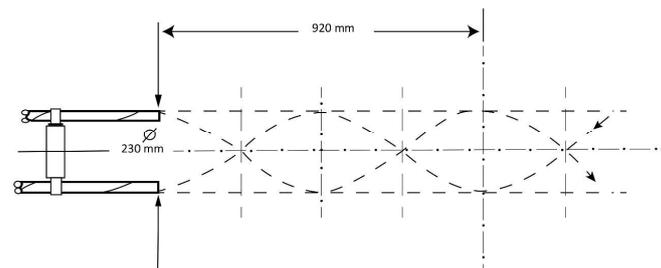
Wavelength of the assembled mold radiator, determined by continuing the spiral-shaped indentation on the cross-section of the radiation beam
